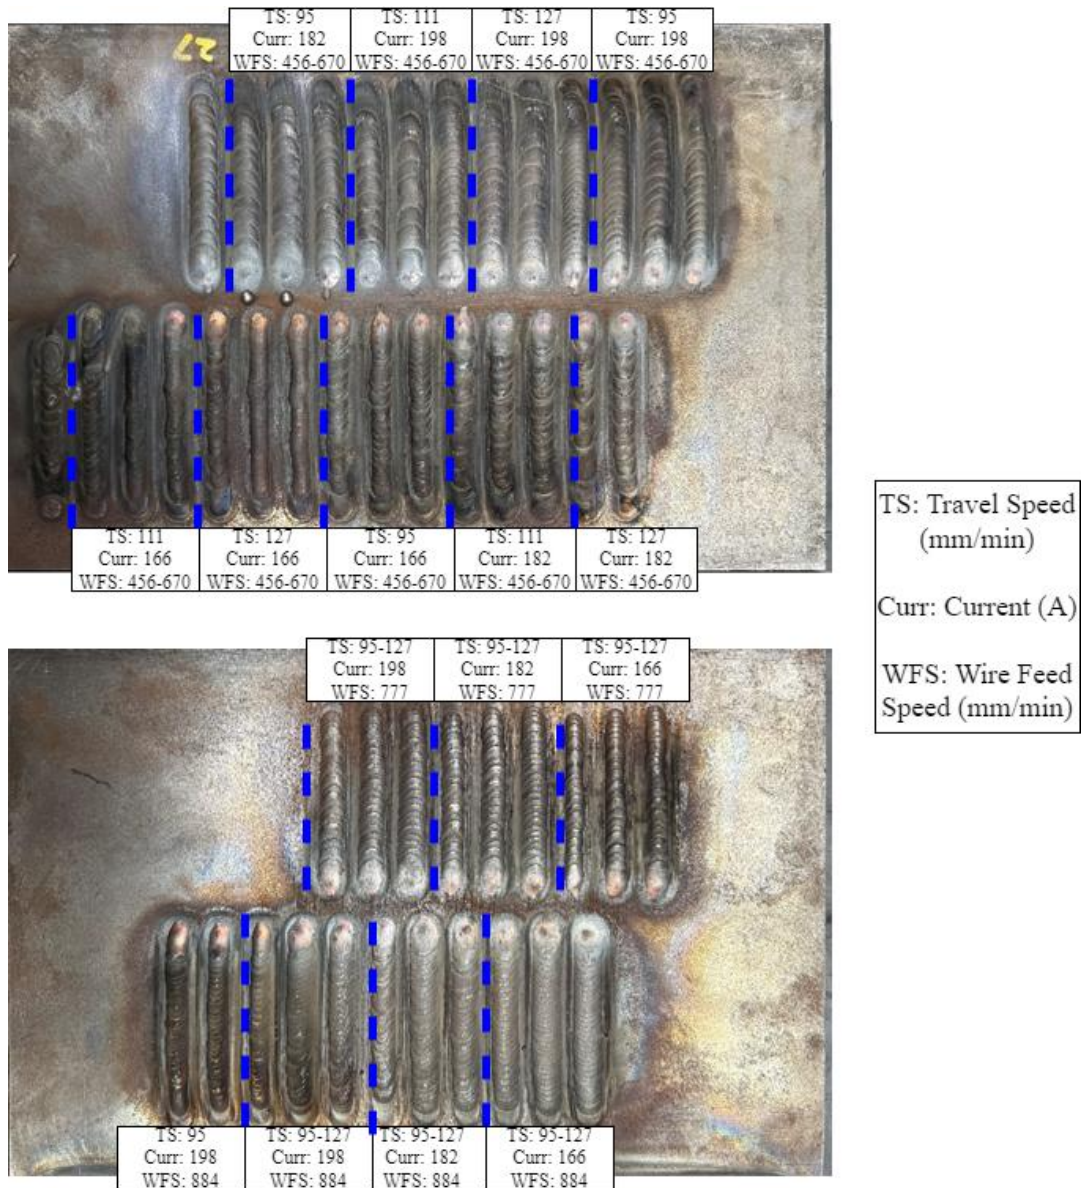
Bead-on-plate weld matrix used for process parameter tuning. Welds were deposited on S275 steel using varying heat inputs to evaluate bead shape and sidewall engagement.
